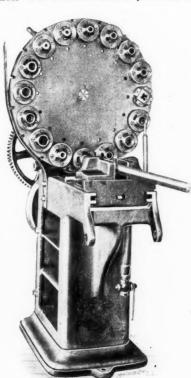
A Bolt or Pipe Threader, with a Variety of Dies ready for Use.
